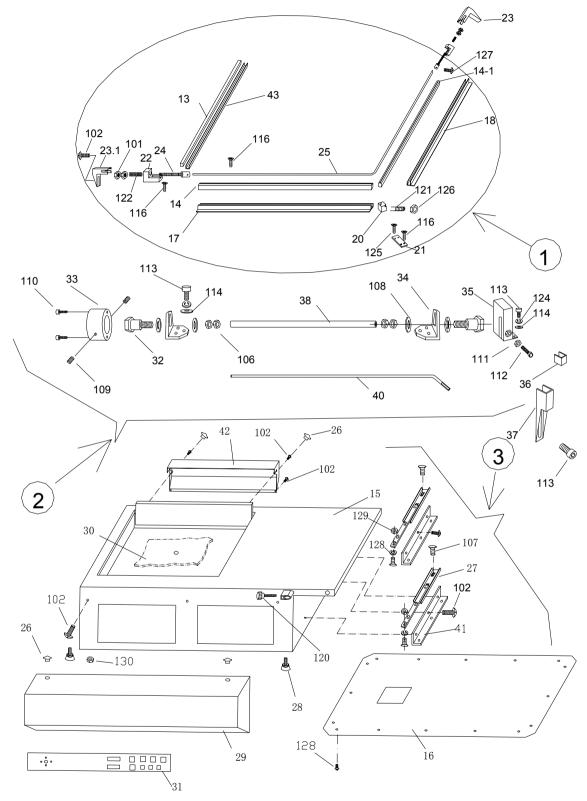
SEALING BAR, TORSION SPRING, CABINET UNIT
